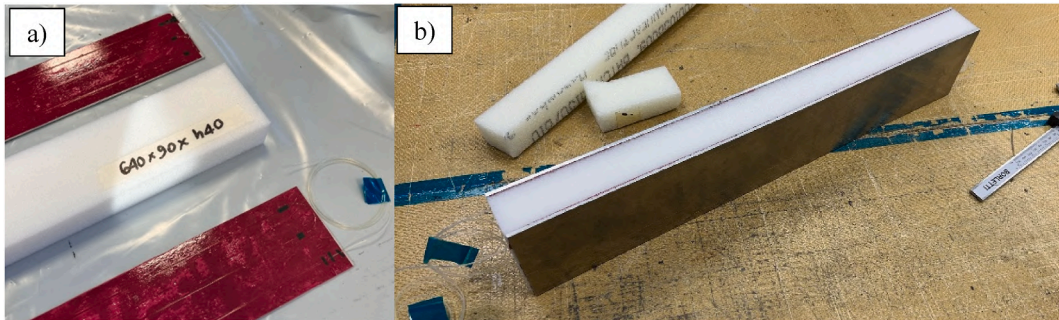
a) Details of DFOSs placed on the Ergal face-sheets, adhesive layer (in red) and Rohacell® IG-31 foam; b) final manufactured sandwich specimen (B2) after mechanical pressing.
